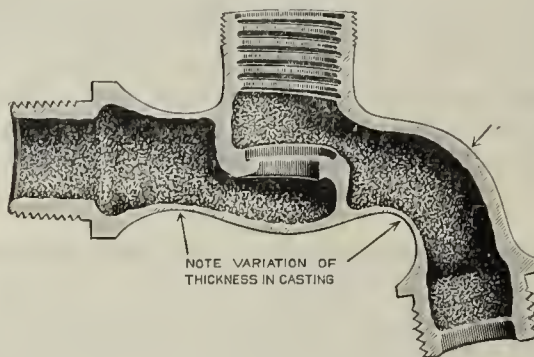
Sectional View, Showing Defective Construction.
